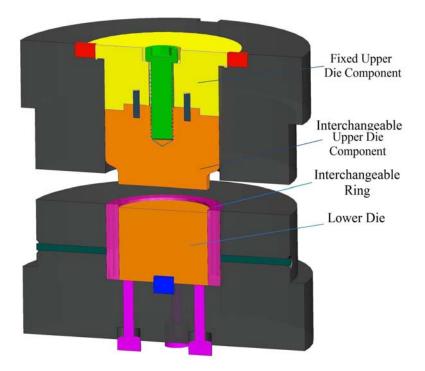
Assembly of Die Set for Coin Diameter of 70 mm
